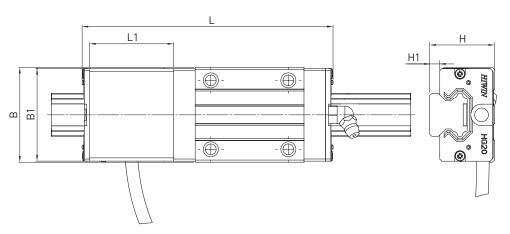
Scale drawing of the HGH20CA block including the MAGIC-PG housing
